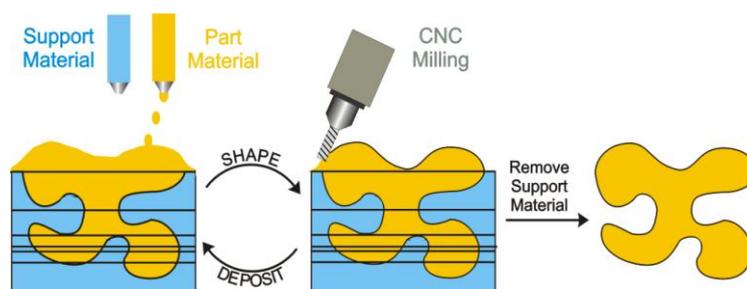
Shape Deposition Manufacturing (Cross-sectional View)
